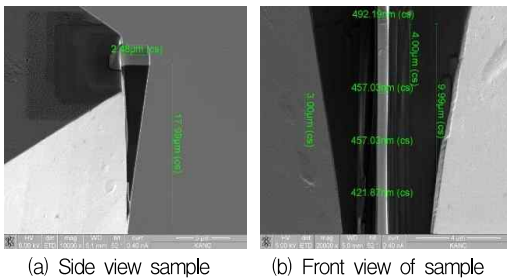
SEM images of 492.19 nm cutting edge width tool by the focused ion beam machined (beam current: 0.1 nA, voltage: 30 kV); (a) side view of sample (b) front view of sample
